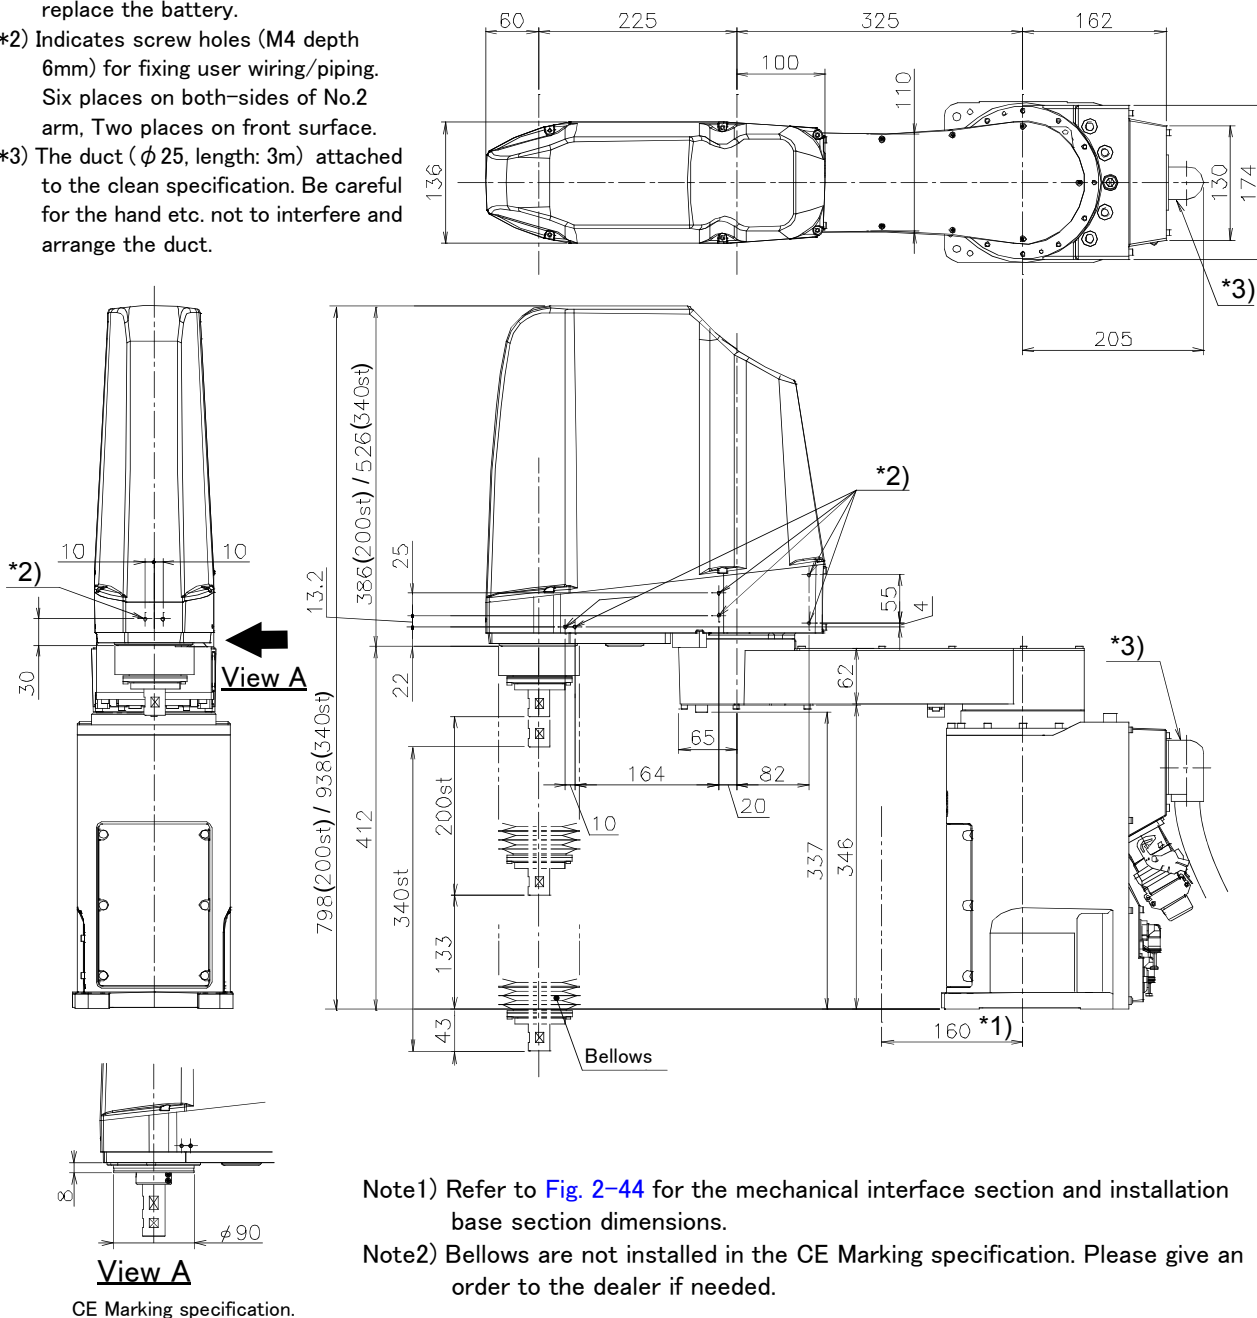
Outside dimensions of RH-6FH55xxC/M
